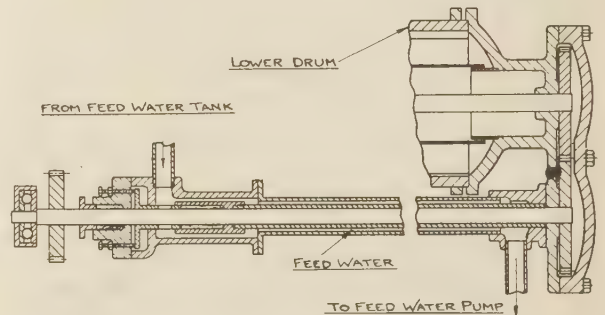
PROPOSED METHOD OF DRIVING THE IMPELLER
